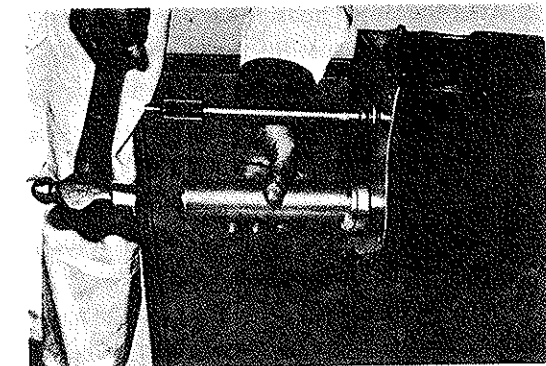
Press-Fitting of Counter Gear Front Bearing
